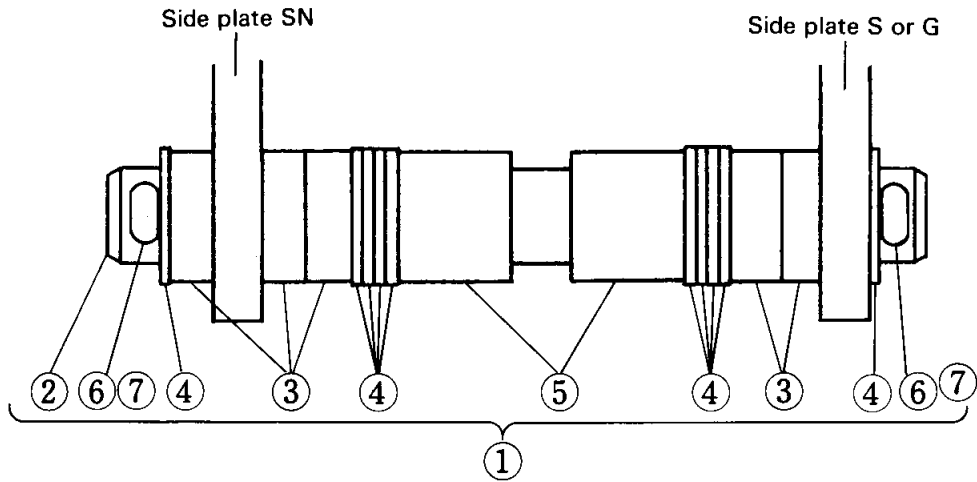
Suspension shaft W30 assembly. (0.5 t, 3 t)
